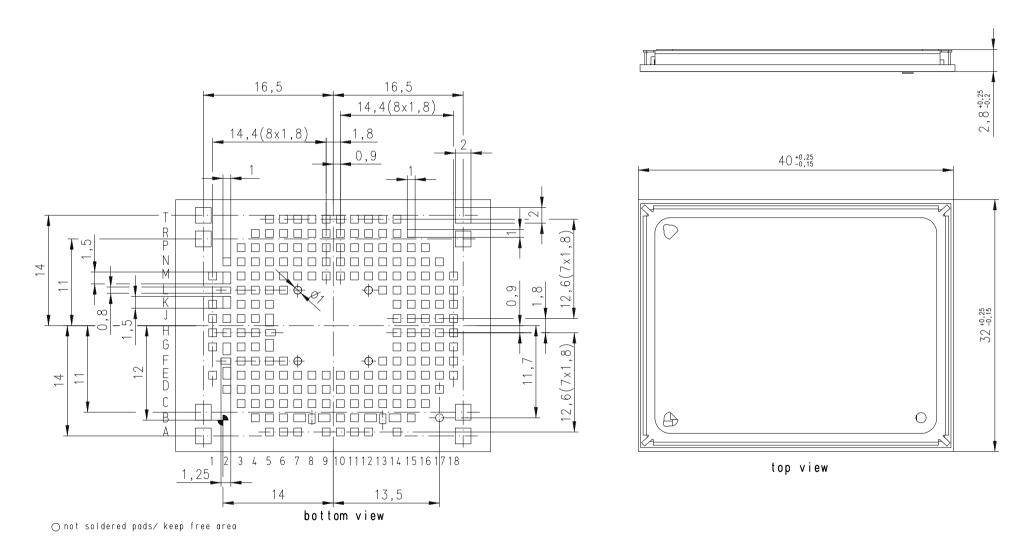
Dimensions of PLAS9-X (all dimensions in mm)
